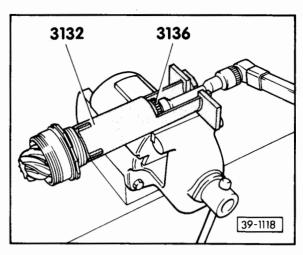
Unscrewing and tightening slotted nut (Only on final drive with viscous coupling)
